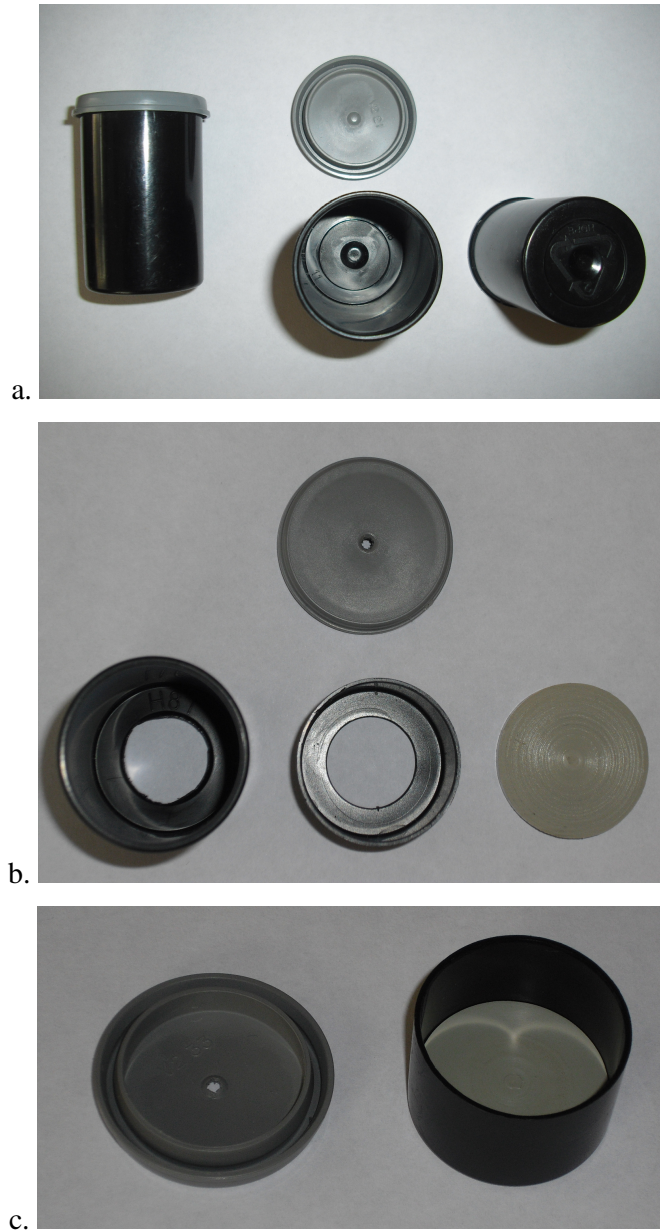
A photograph showing an original film case (a) and one adapted for use as the initial and final mould (b) and the final mould assembled (c).
